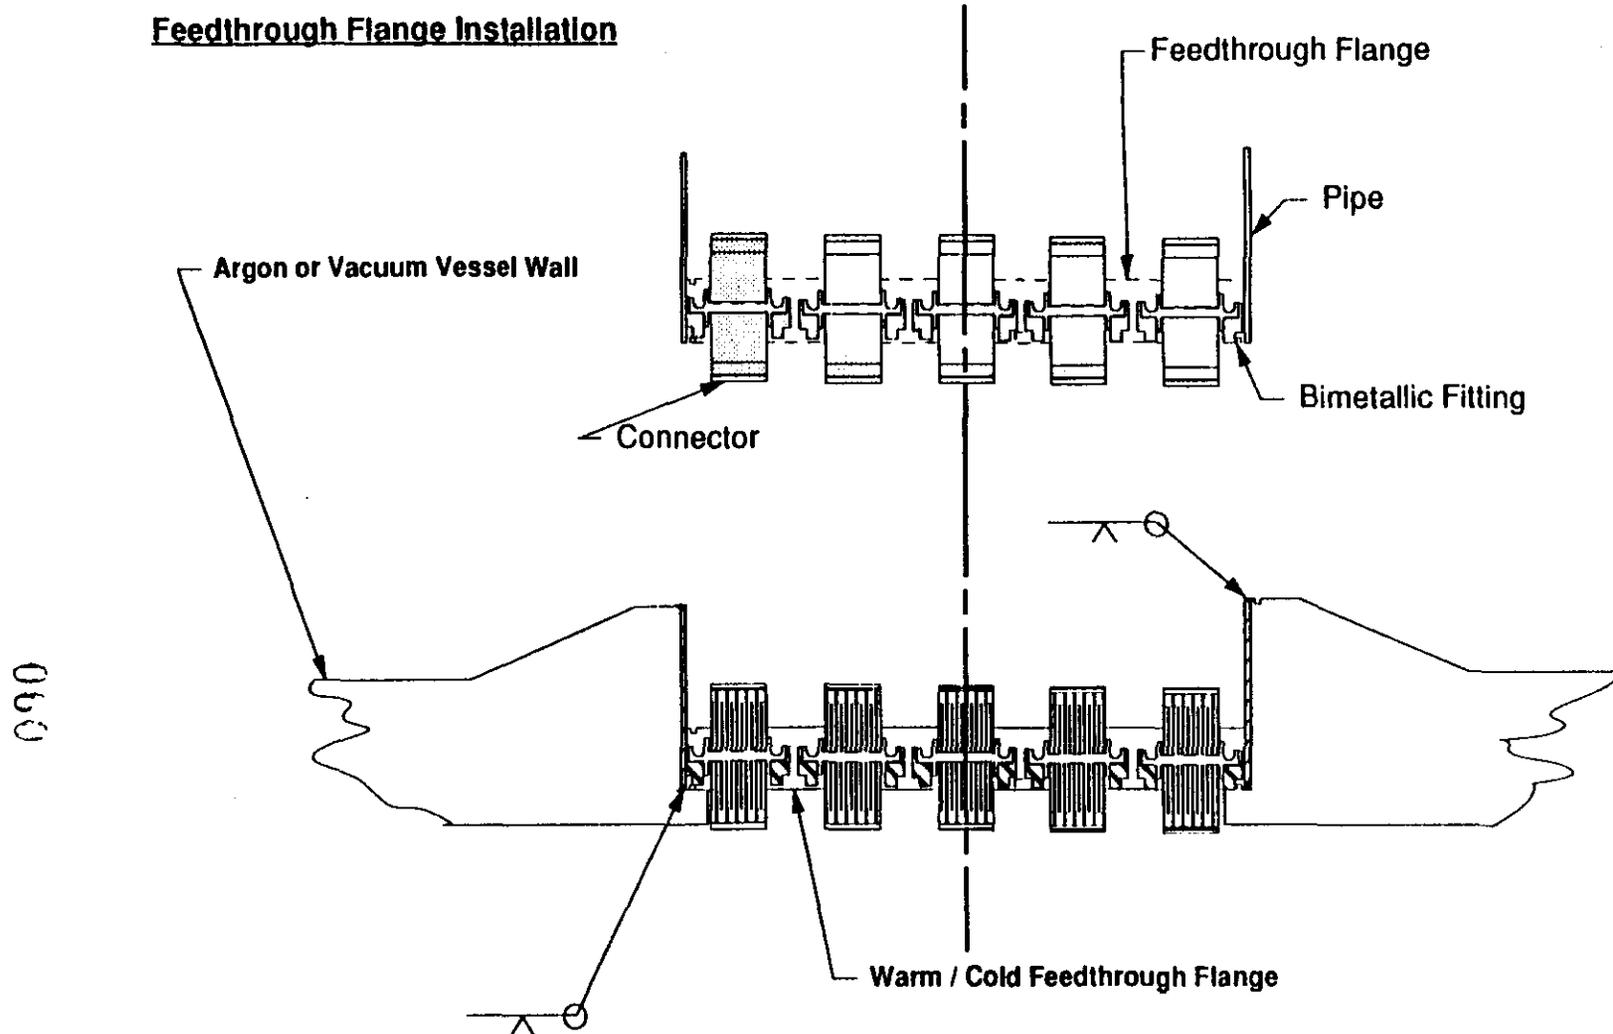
Shown Feedthrough Plate and Pipe Extension Ready for Assembly into Vessel and Assembled
